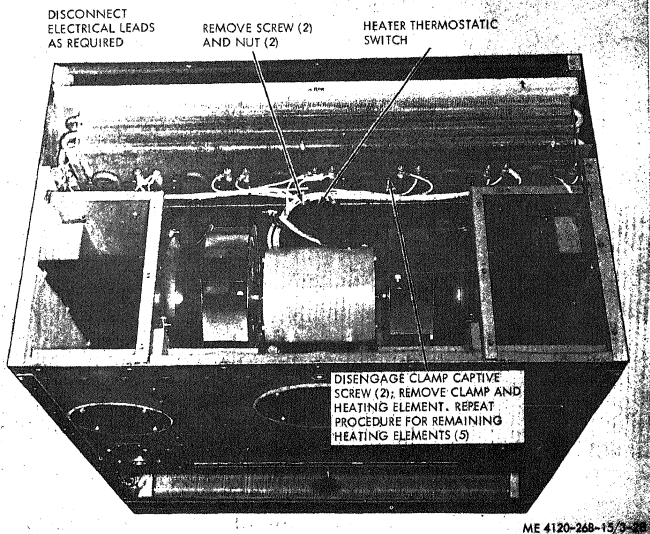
Heating elements and thermostatic switch, removal and installation.
